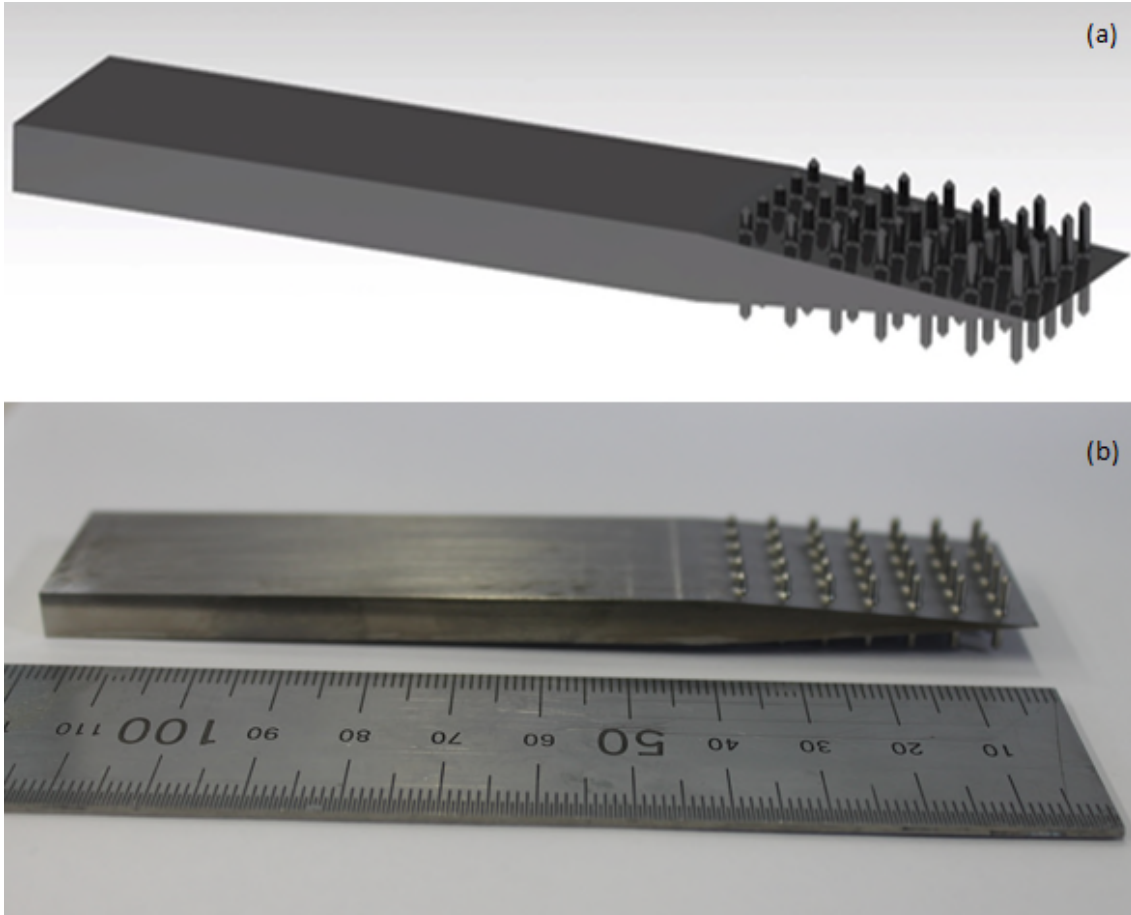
Double-scarf joint with spike pins: (a) 3D CAD image, (b) micro-machined joint
